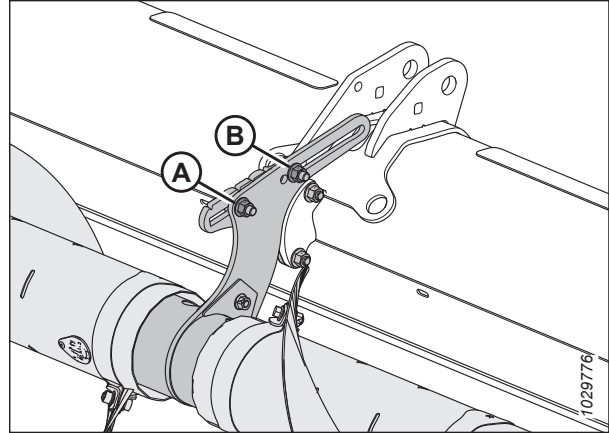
Initial Position of Adjustable Mounts – Two-Piece Auger
